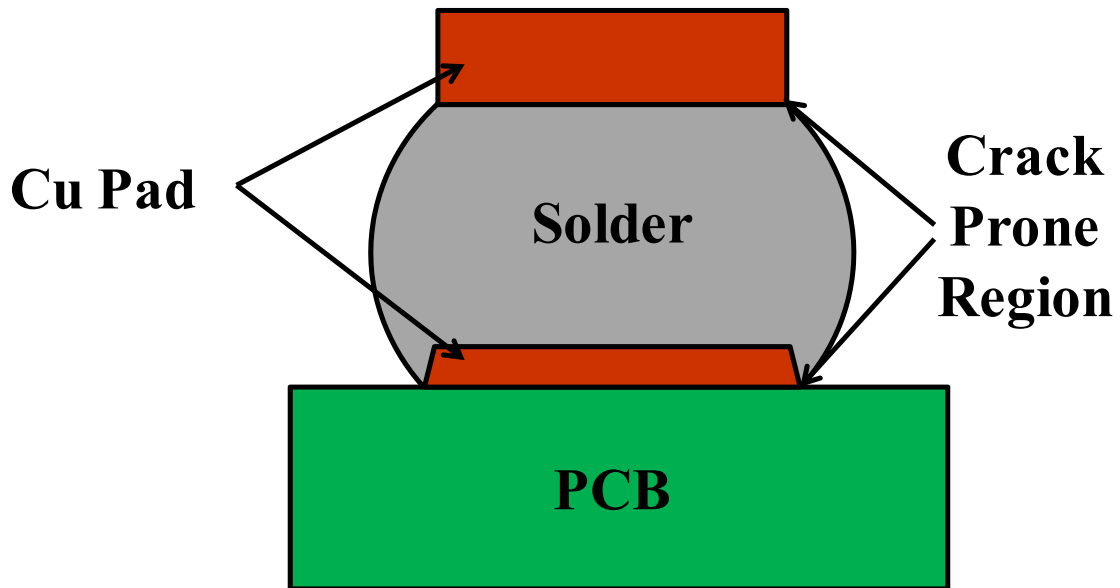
Schematic of typical Cu-Solder Interface in solder interconnect showing crack prone region
